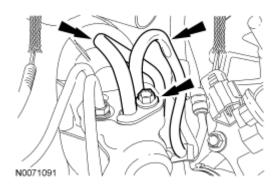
Locating Power Steering Tube Clip And Bolt Courtesy of FORD MOTOR CO.
